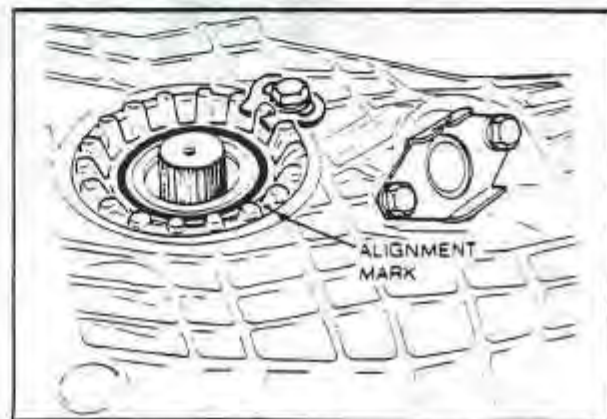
DIFFERENTIAL ADJUSTING NUT
